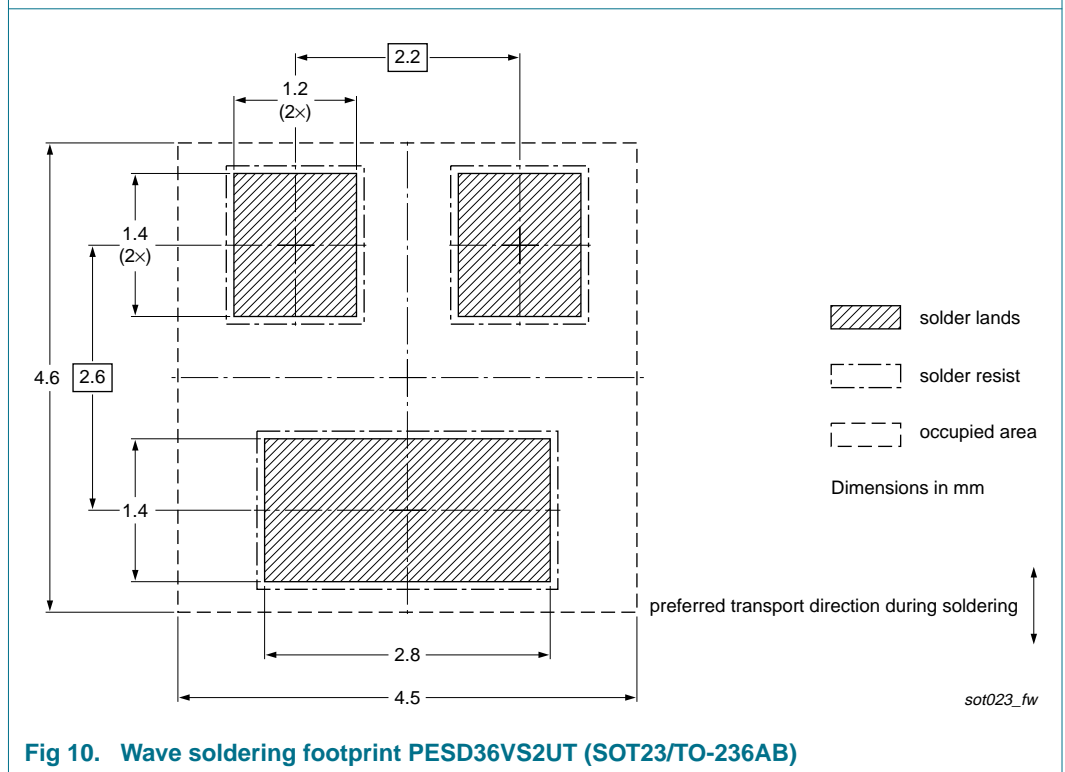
Wave soldering footprint PESD36VS2UT (SOT23/TO-236AB)
